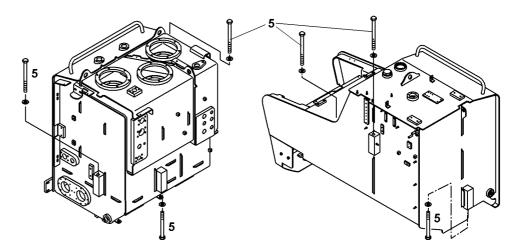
Hydraulic oil tank and fuel tank mounting bolts
